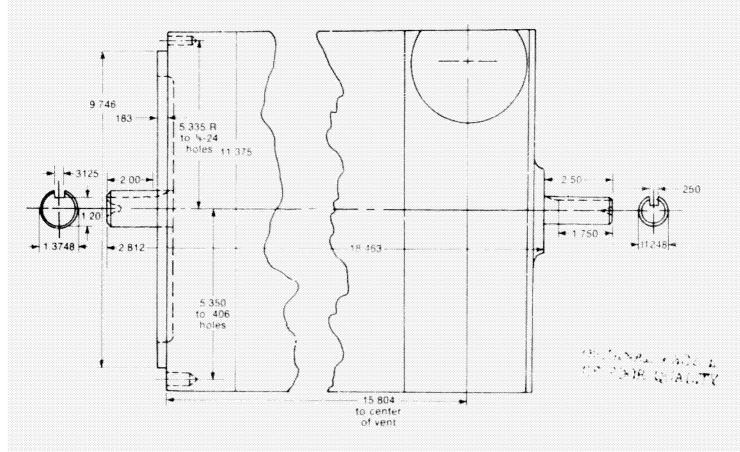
Outline Drawing of General Electric 5BT2366C10 Motor
